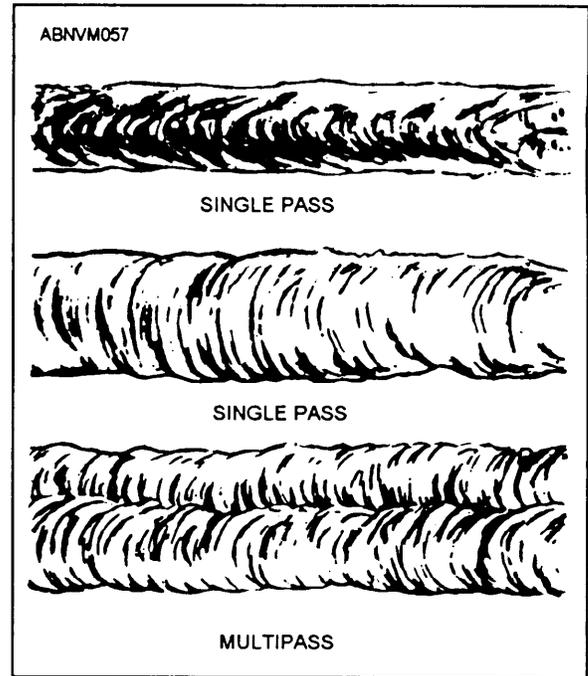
Acceptable single-pass and multipass GMA welds.
